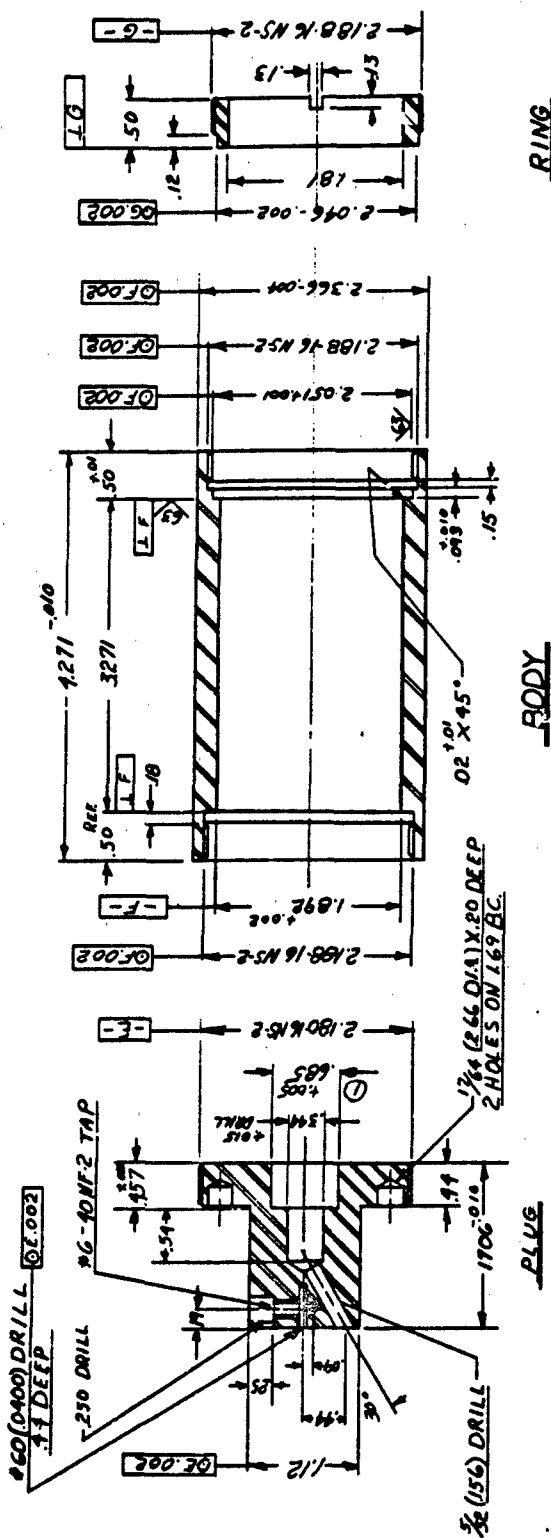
Test Body Details and Penetration Assembly, Scale 2.
